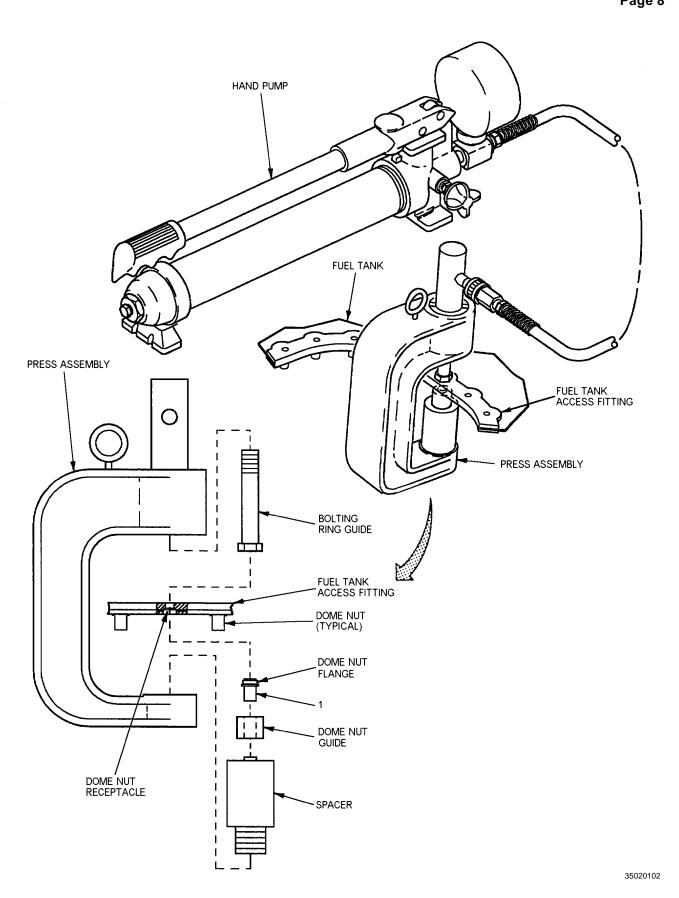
Fuel Tank Access Fitting Dome Nut Replacement (Sheet 2)
